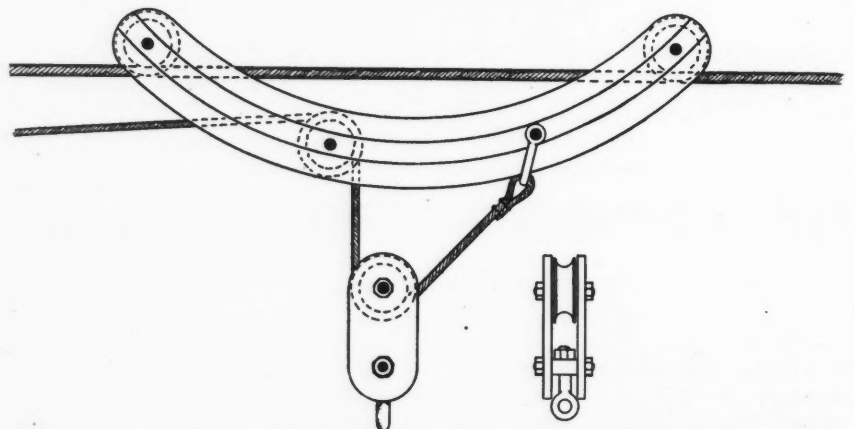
CARRIER FOR AERIAL ROPE HOISTING IN SHAFT SINKING
